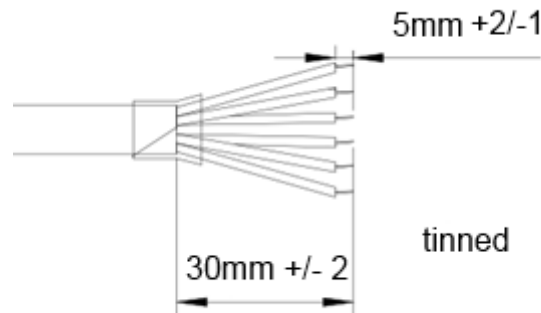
USBC-FS-UART-5V-5V-1800-WE Mechanical Details (dimensions in mm)
